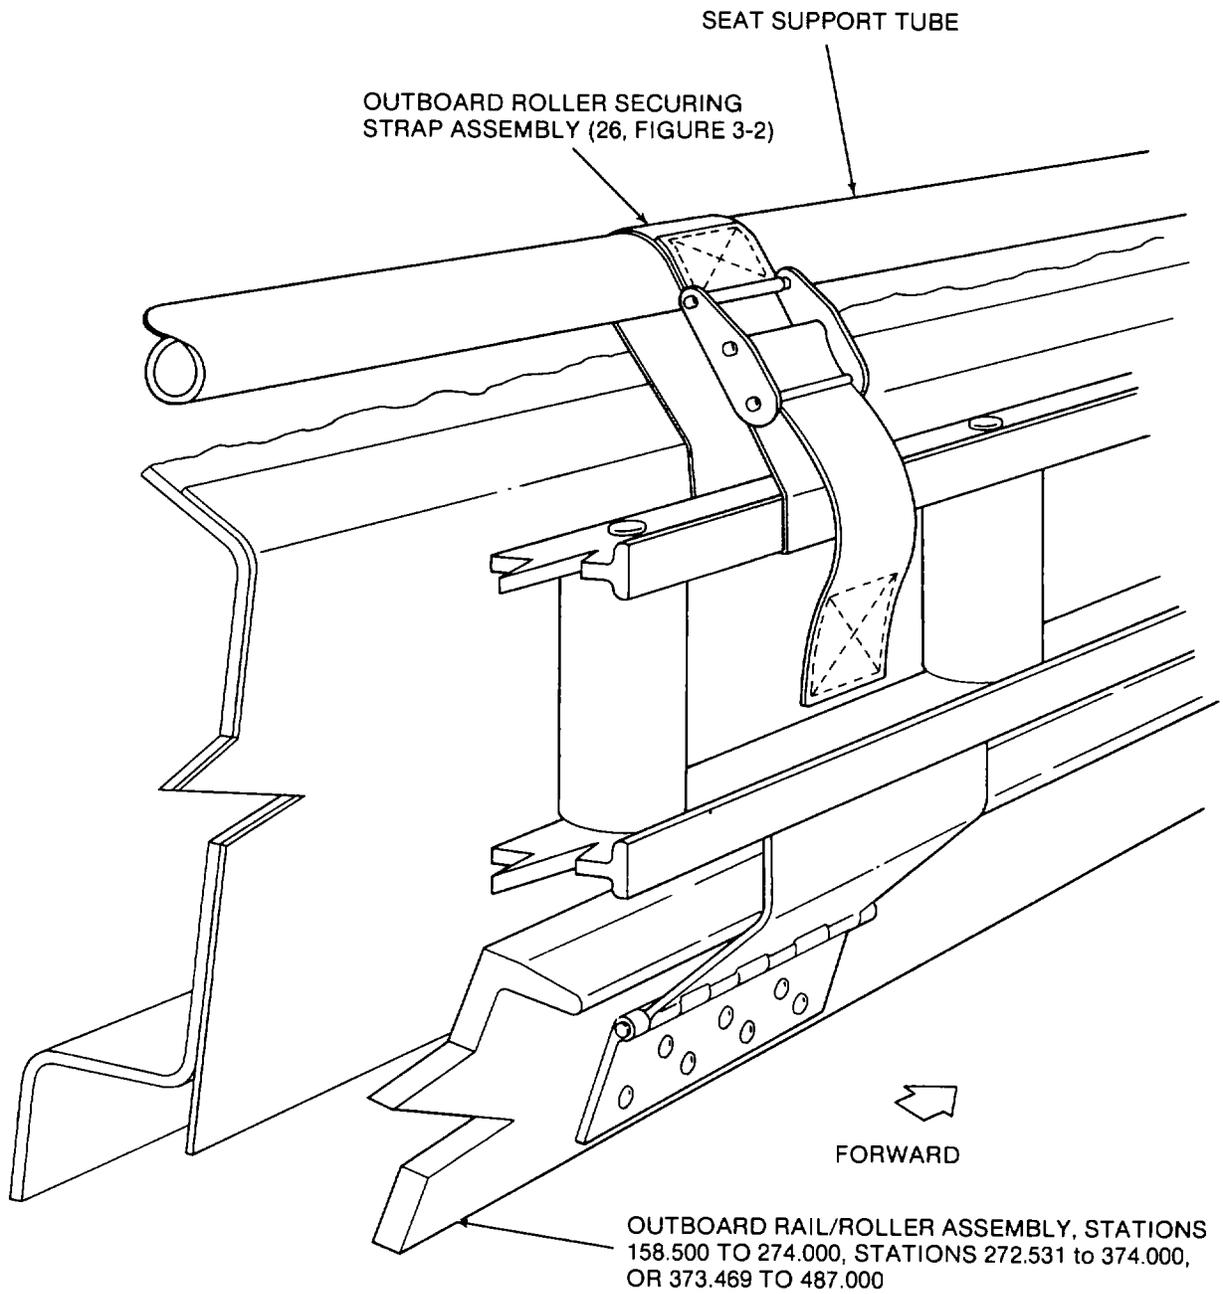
Outboard Rail/Roller Assembly in Stowed (Up) Position
